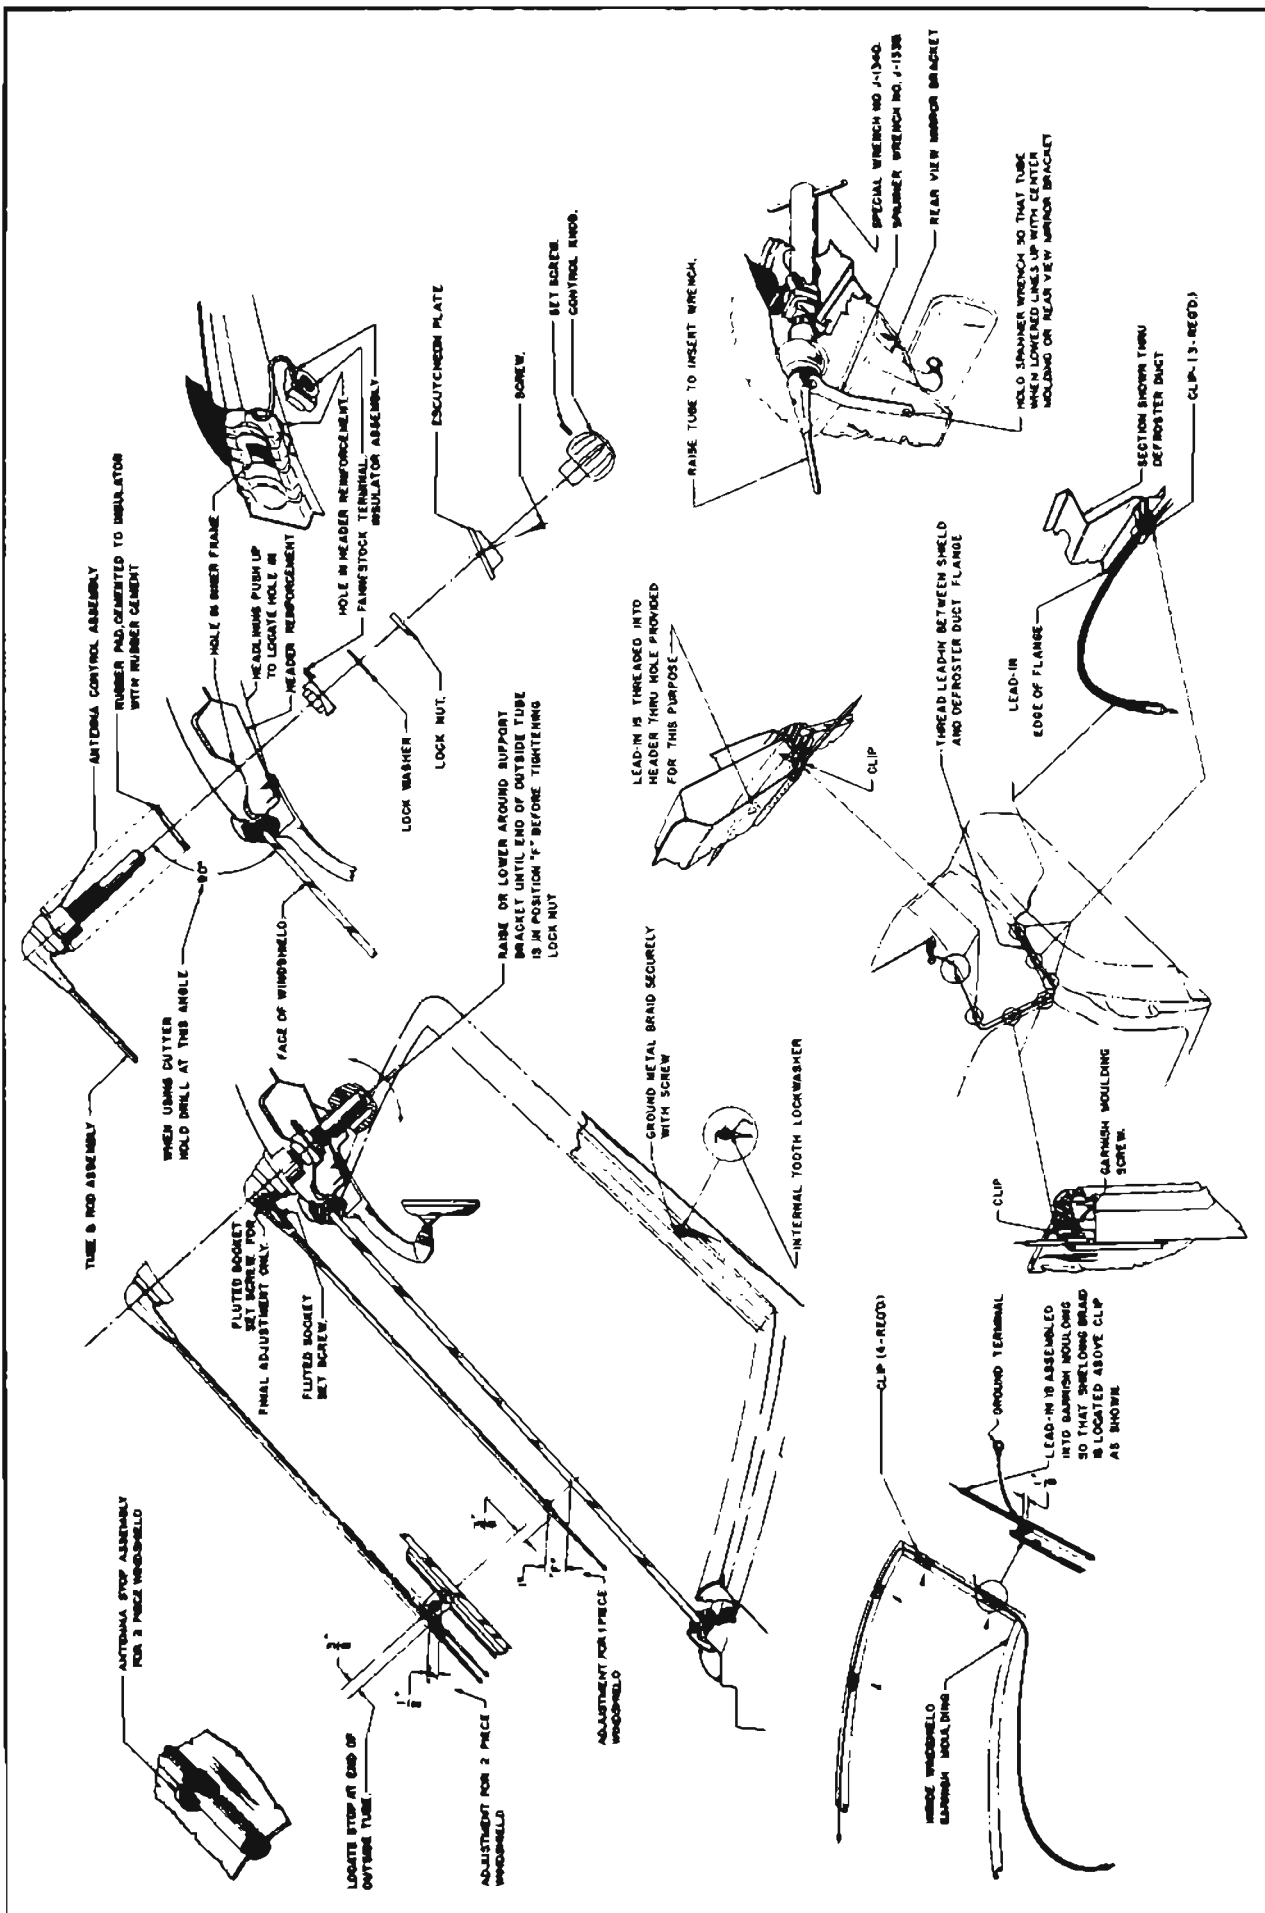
Antenna Installation Details—Closed Bodies and Model 45R
